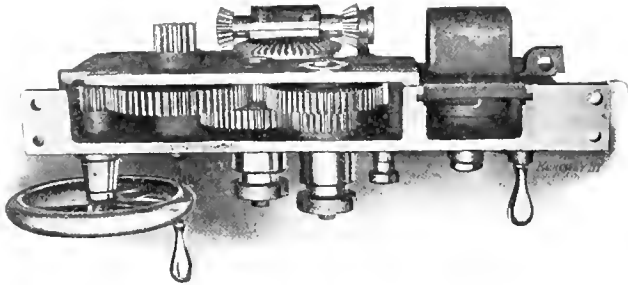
View from the Top of the Apron of Lathe, showing Arrangement of Gearing
